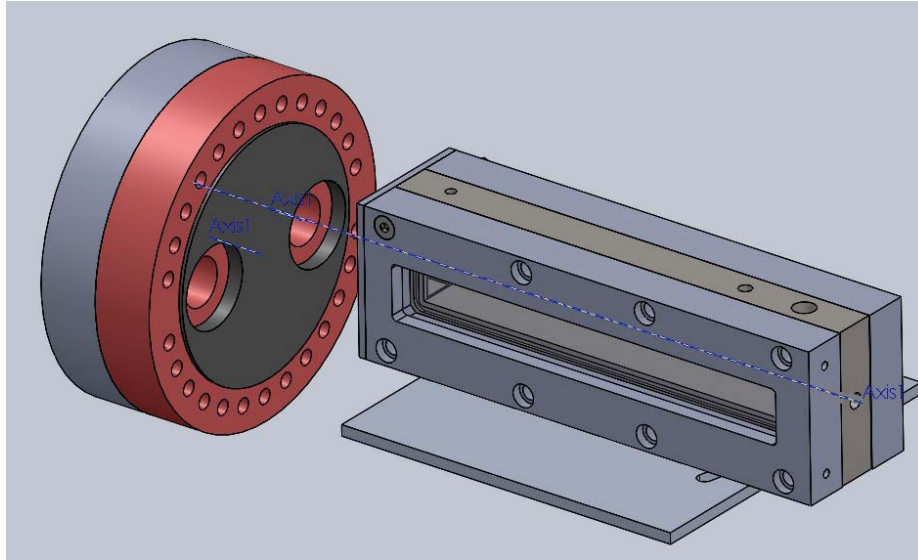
Main chamber and Pre-chamber assembly CAD drawing
